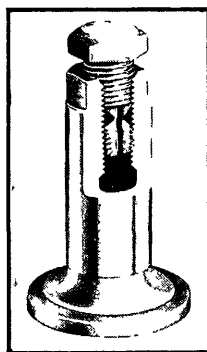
Self-locking tappet adjusting screw, 1939-52 Champion
